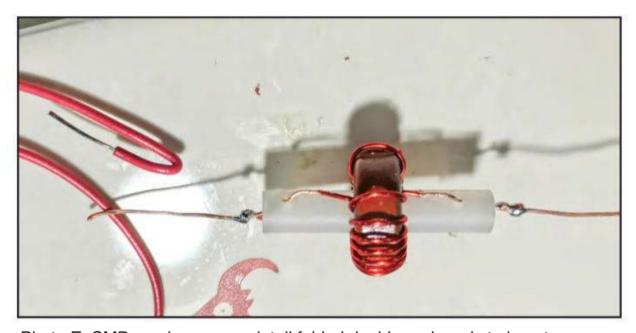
Photo E. SMD cap in spacer, pigtail folded double and ready to insert
